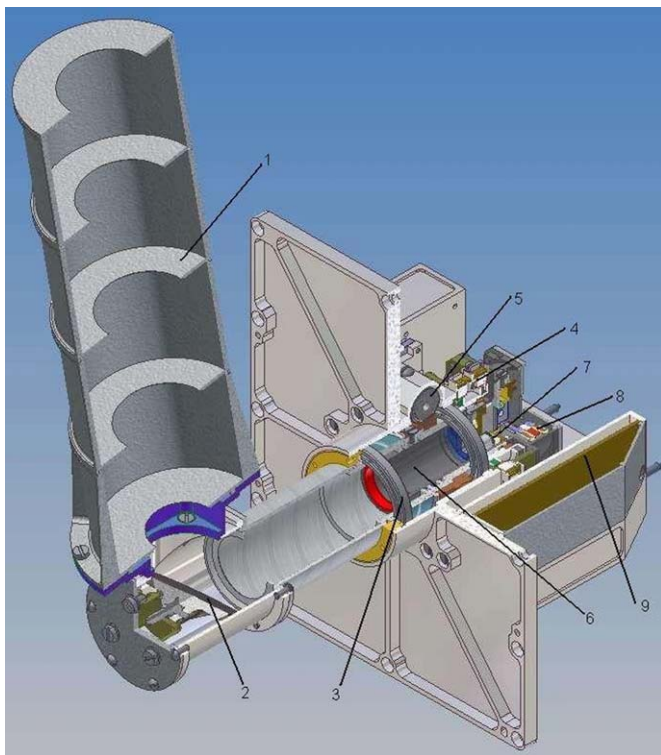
The 3D drawing of the scanner mechanism. The main elements are: 1—entry baffle; 2—scanner head with parabolic mirror; 3—ball bearings; 4—rotation angle gauge; 5—driving mechanism; 6—internal baffle; 7—light detector (photometer); 8—shutter; 9—electronics.
